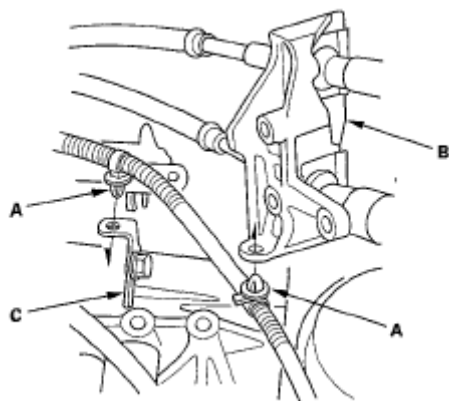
Identifying Shift Cable Bracket Cotter Pins And Lock Pins (07-08
